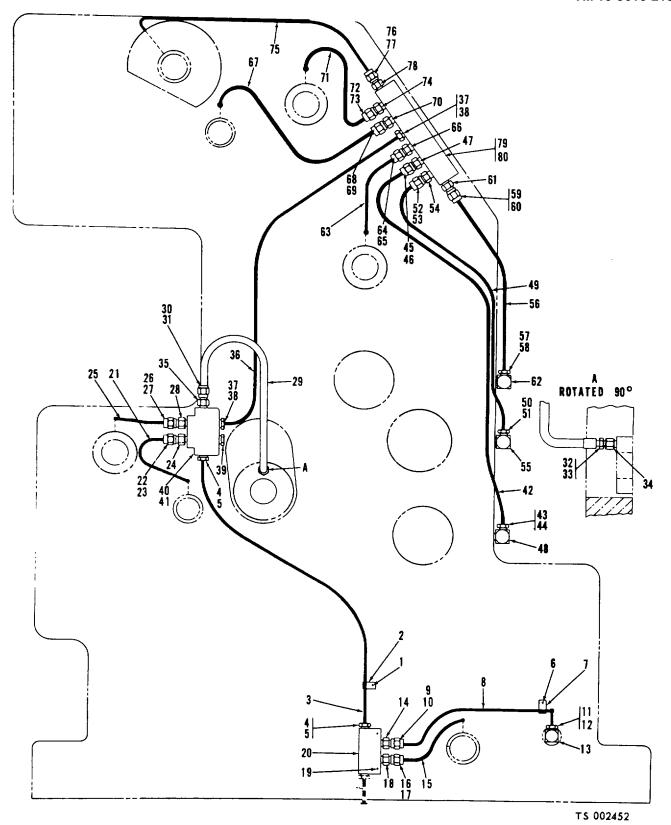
Offset unit oil line assembly. (Sheet 1 of 5 ) 4-22
